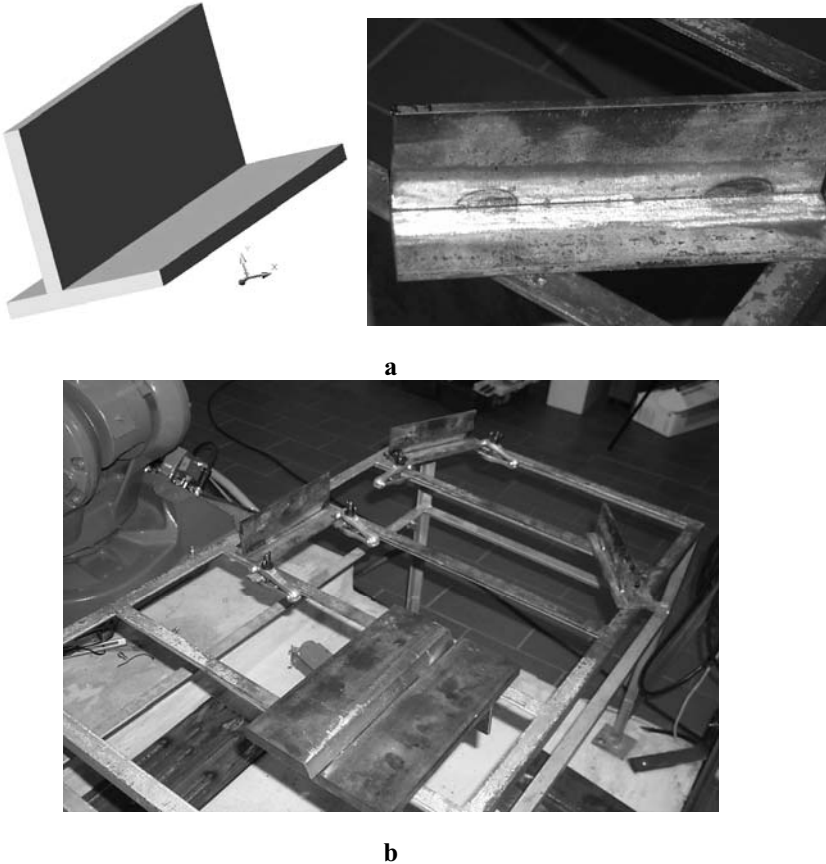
a, b. Aspect of the working pieces: a - Fillet weld preparation; b - Working table in the laboratory
